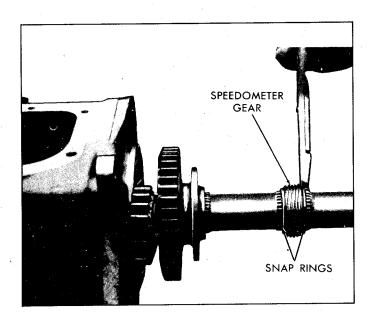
B-4K--Speedometer Gear and Retaining Rings
